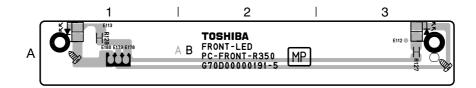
EU56 Front LED PC Broad (Bottom side)
